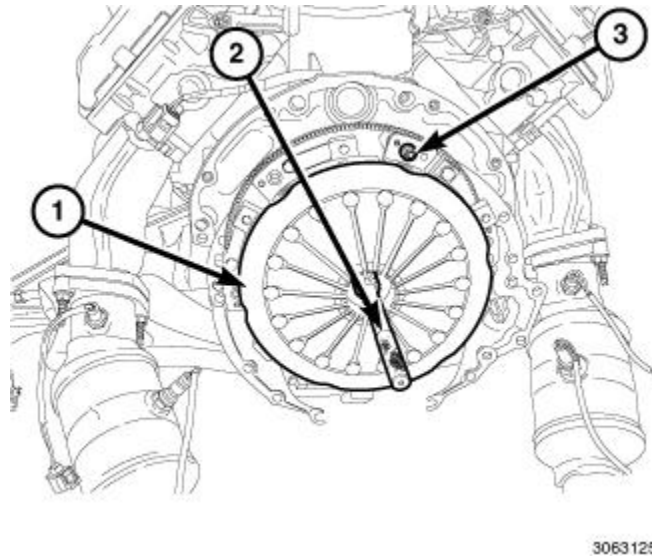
Pressure Plate Assembly, Alignment Tool & Bolts
